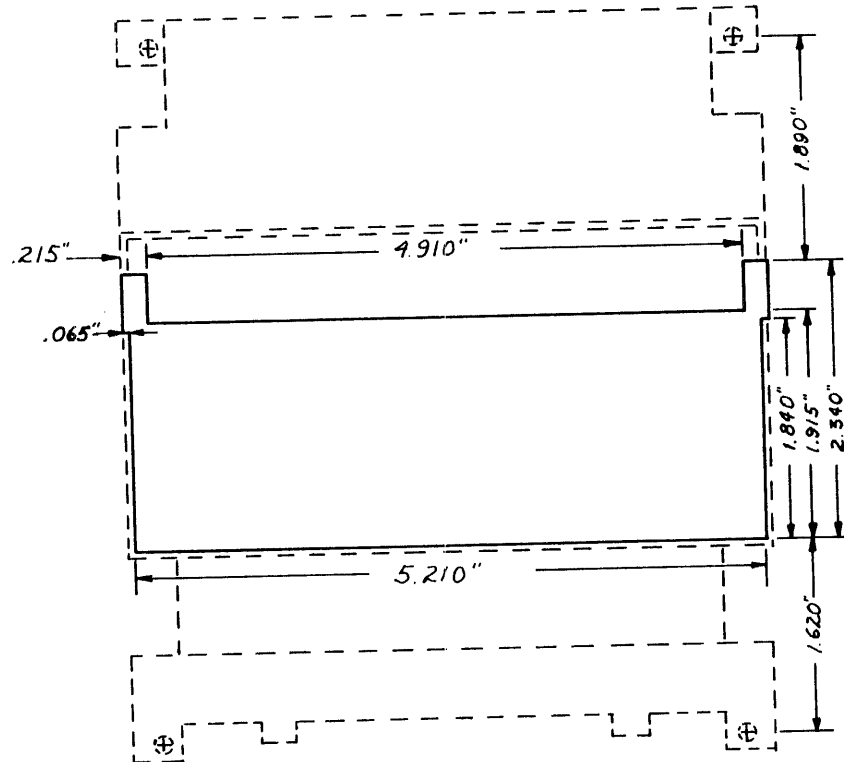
SIDE VIEW OF SURFACE MOUNTING
